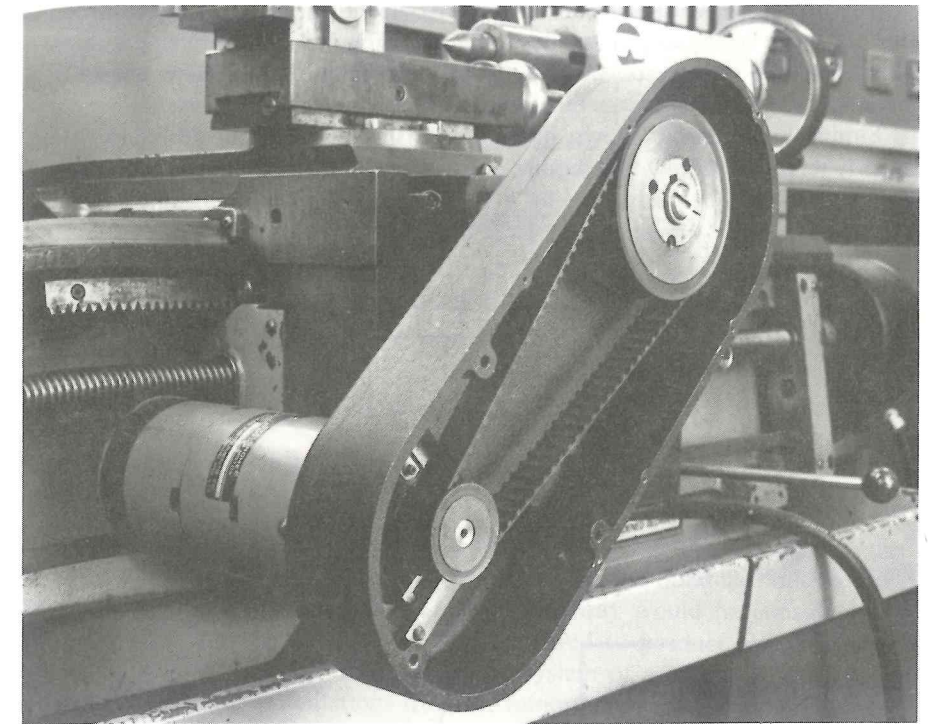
(b) Conventional milling machine fitted with servo motors.
